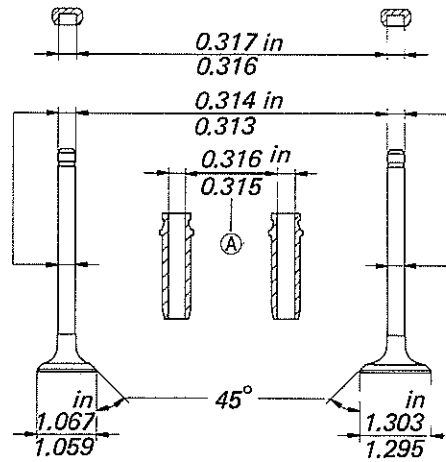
Standard Dimensions of Valves, Valve Guides, Valve Gap
